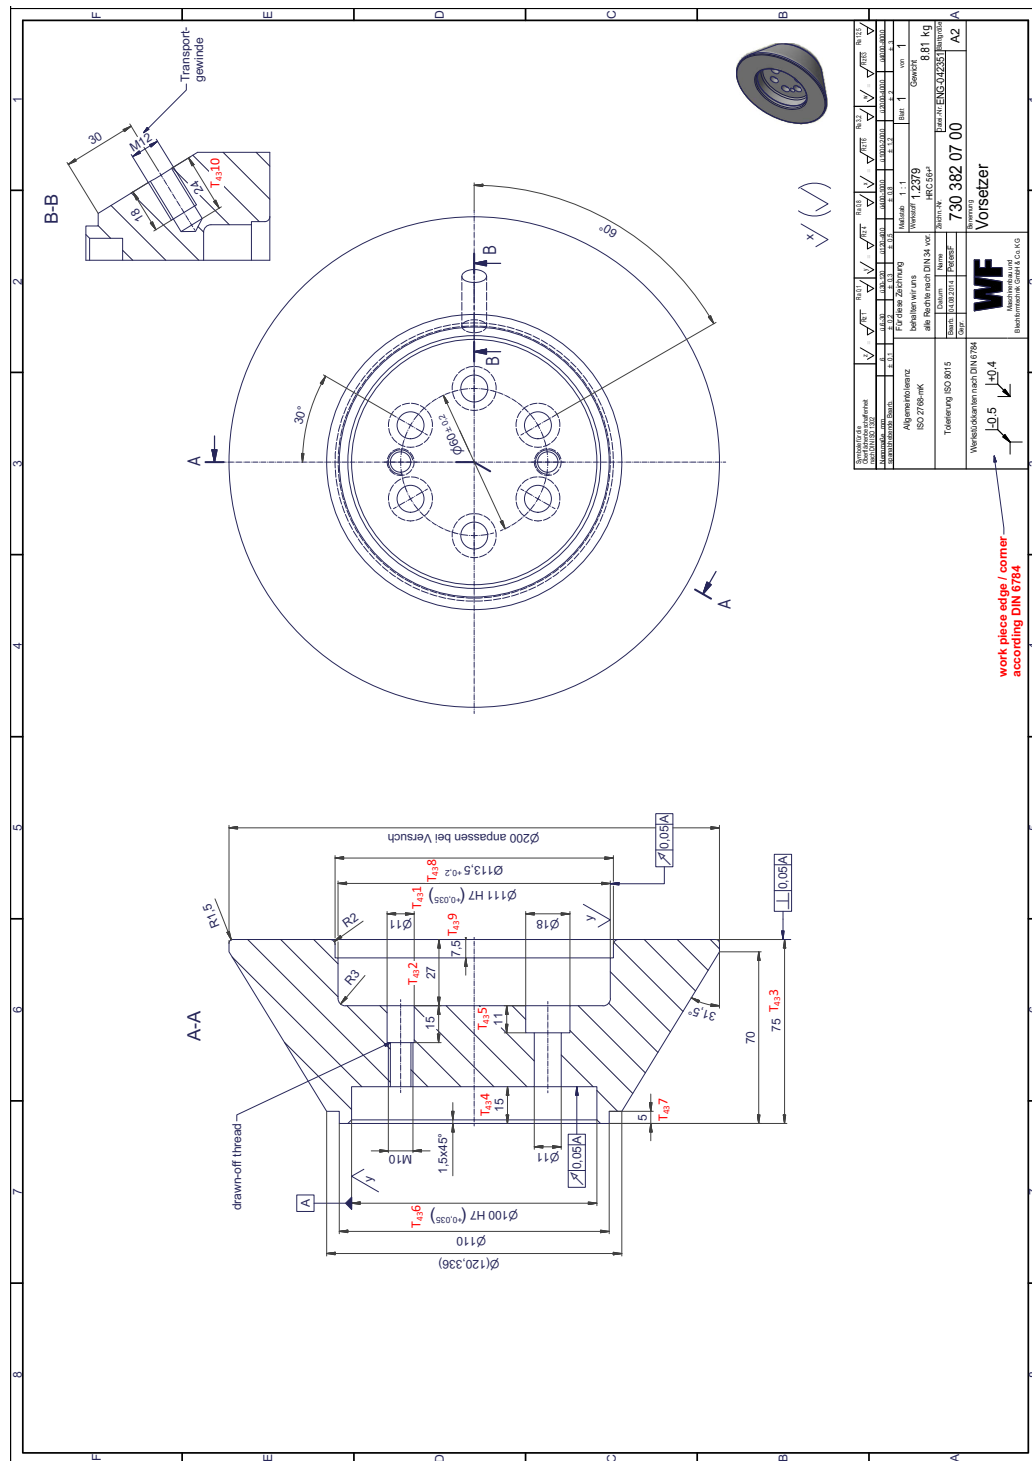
Drawing: Tailstock adaptor – 43°, for blanks up to 12 mm thick, ATI-SF – 730 382 07 00, “Vorseizer”.
